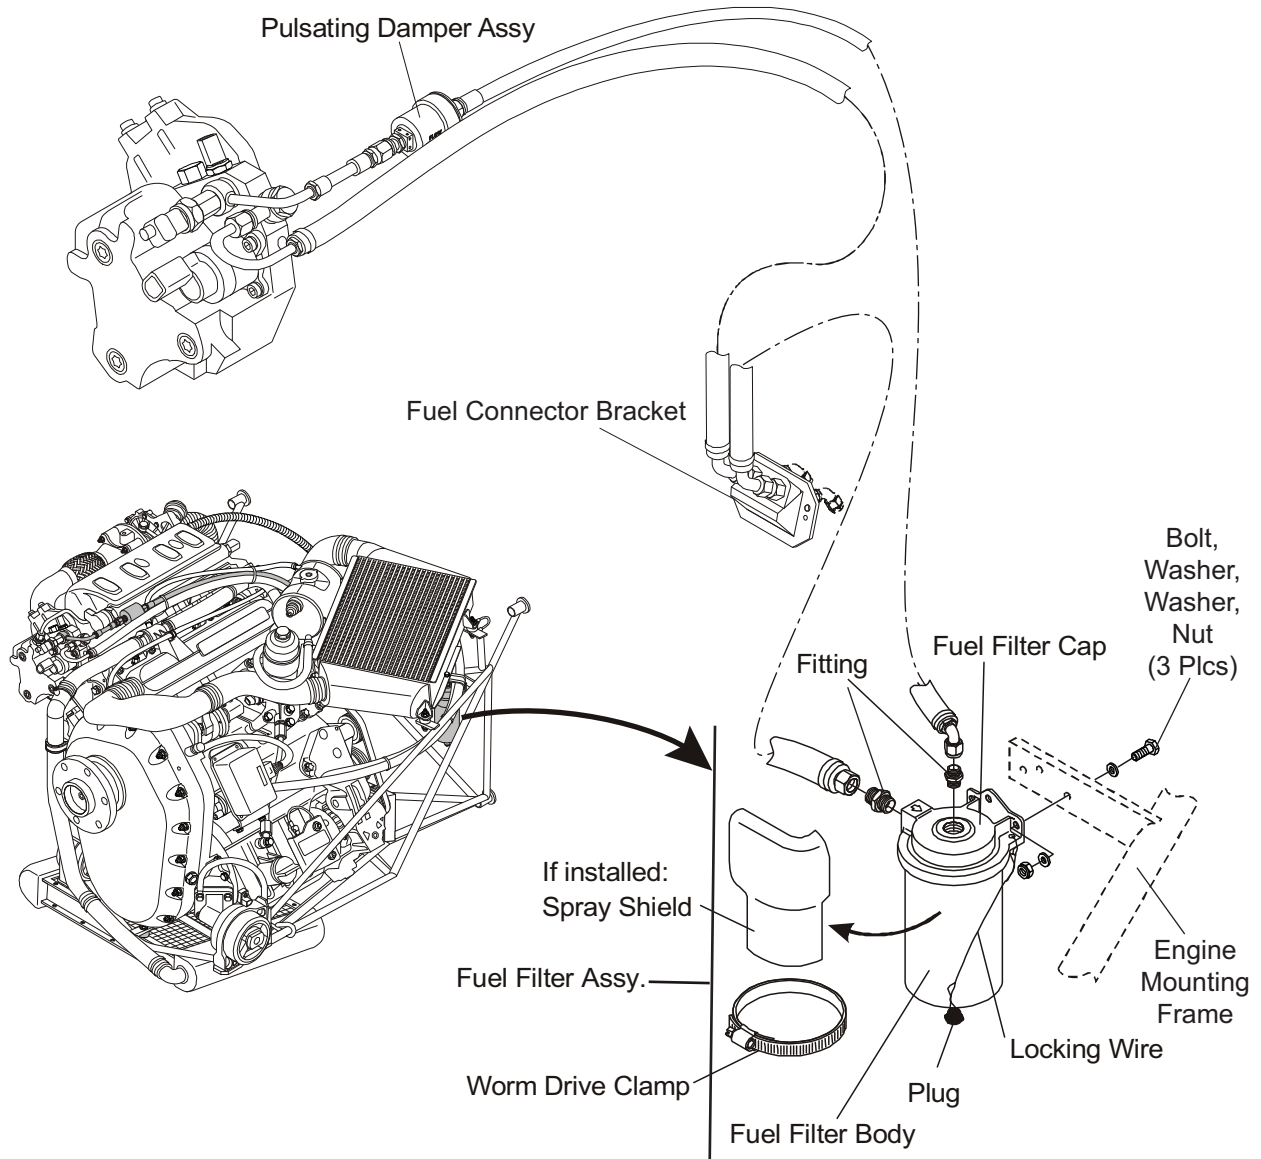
Fuel Filter Body / Assembly - Removal/Installation
